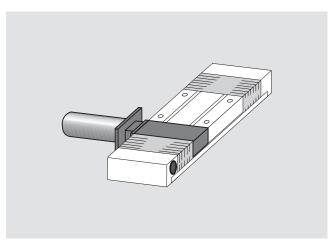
Belt drive at left hand side (Mounting condition 12 or 14)
